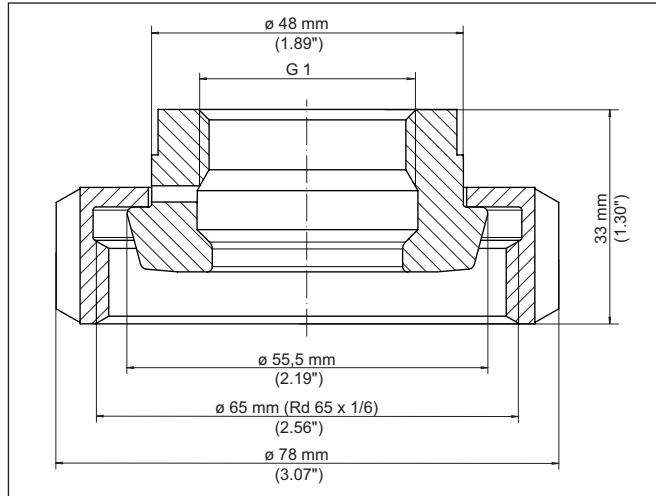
Dimensions hygienic adapter G1 (DIN 3852-X) on slotted nut DN 40 (DIN 11851) PN 40 - O-ring seal
